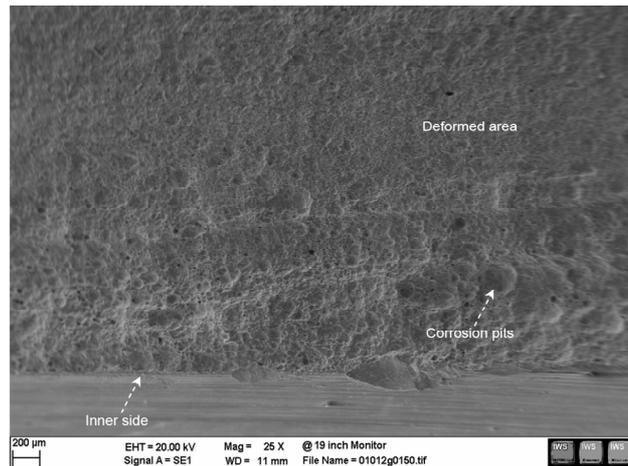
SEM investigation of fracture surface. Area with corrosion pits are caused by cold cracking, deformed area is caused by fatigue crack propagation.
